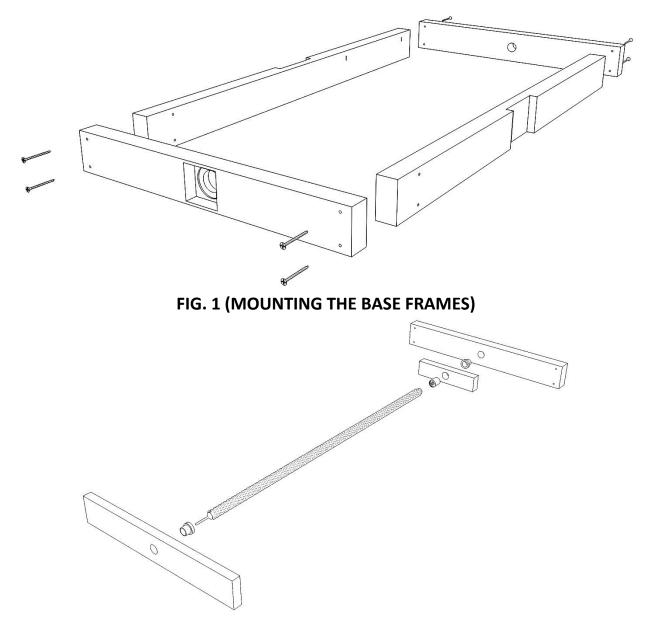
(ADDING THE THREADED DRIVE ROD, MOTOR CONNECTION BOARD AND THE Y AXIS MOVEMENT GUIDE, USING FOR FASTEN IN PLACE 2 PLASTIC NUTS)
